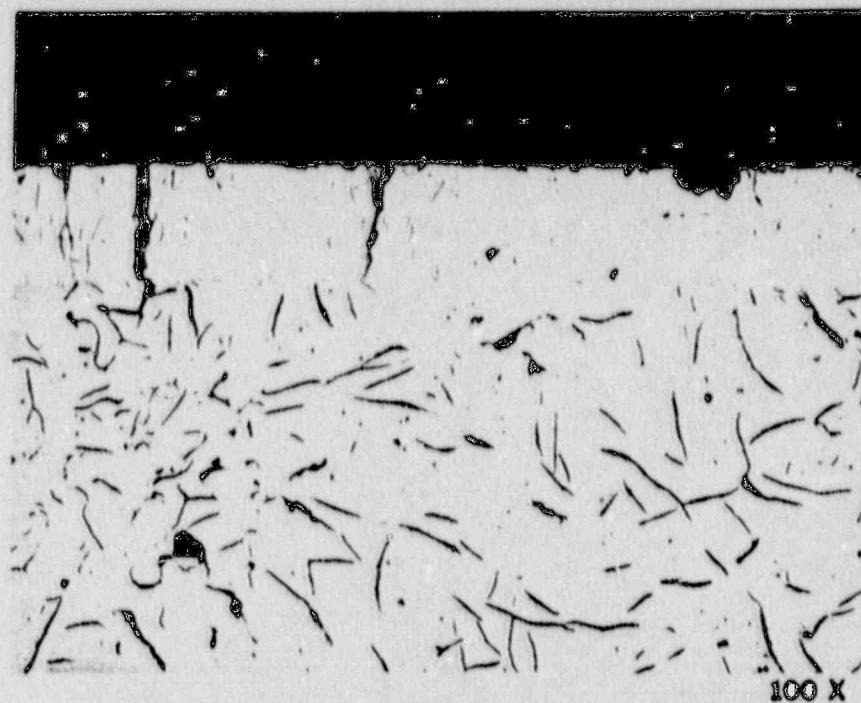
Transverse cross-sectional views of the thrust side of the B diesel 7L liner 22 7/8 inches from the bottom (piece 'A'). The chromium plating is cracked and some of the pores are filled with metallic particles.
